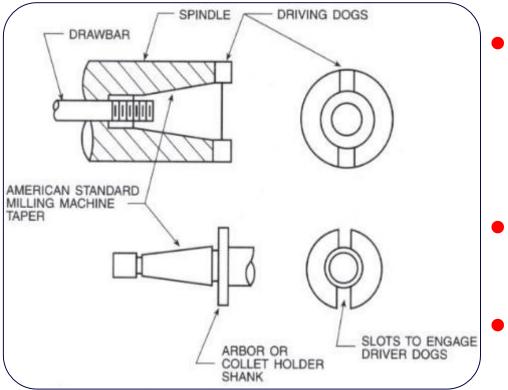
American Standard Milling Machine Taper used on spindle and arbour (or collet holder shank)
